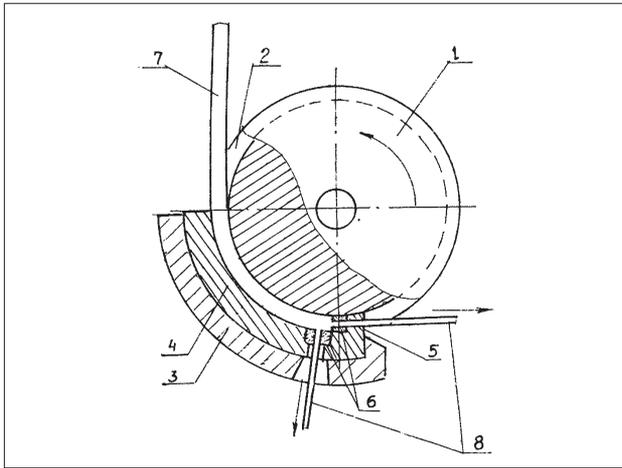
Setup for continuous pressing by the Conform process [6,7]: 1-driving wheel; 2- ring groove; 3- shoe; 4- ring insert; 5- stopper; 6- matrix; 7- semifinished product; 8- finished product
